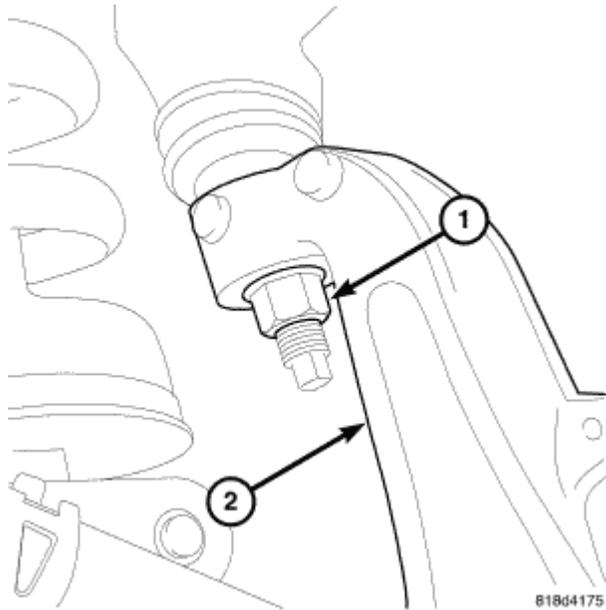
Identifying Upper Ball Joint Nuts & Steering Knuckles
